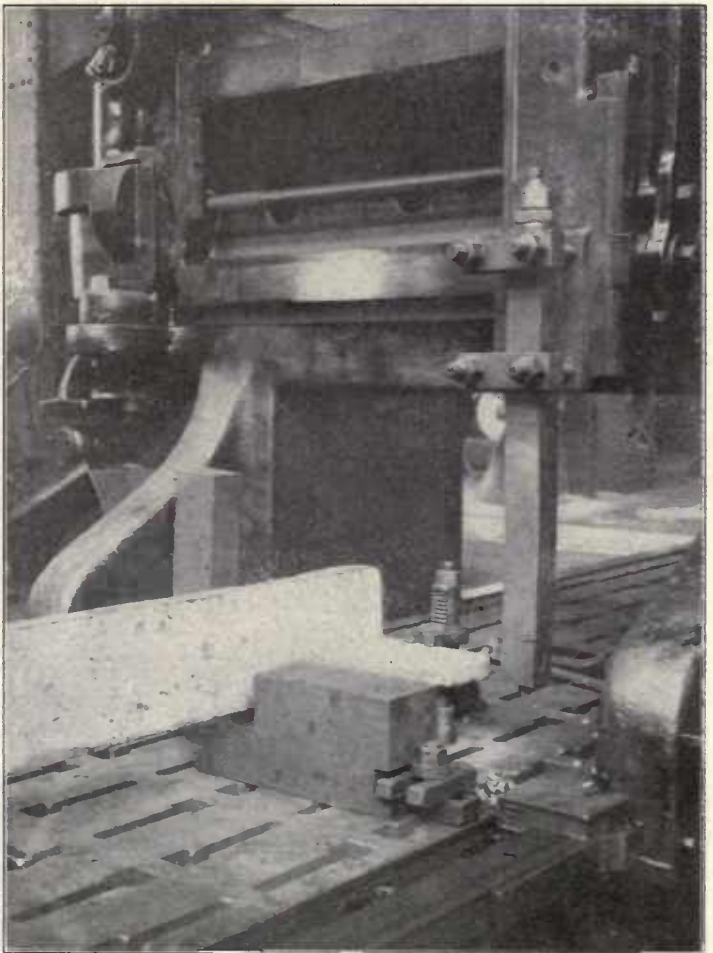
Slotting the End of a Grate Bearer Cross-Tie.
